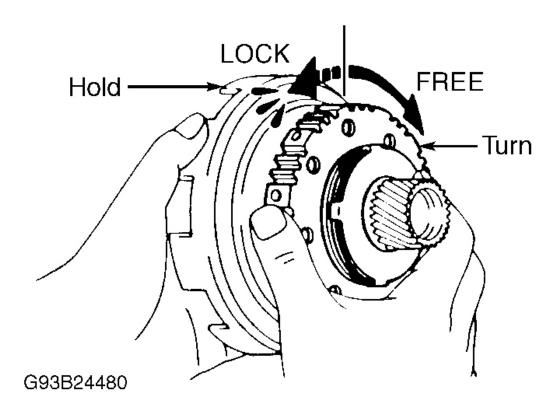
Checking No. 1 One-Way Clutch Courtesy of TOYOTA MOTOR SALES, U.S.A. INC.
